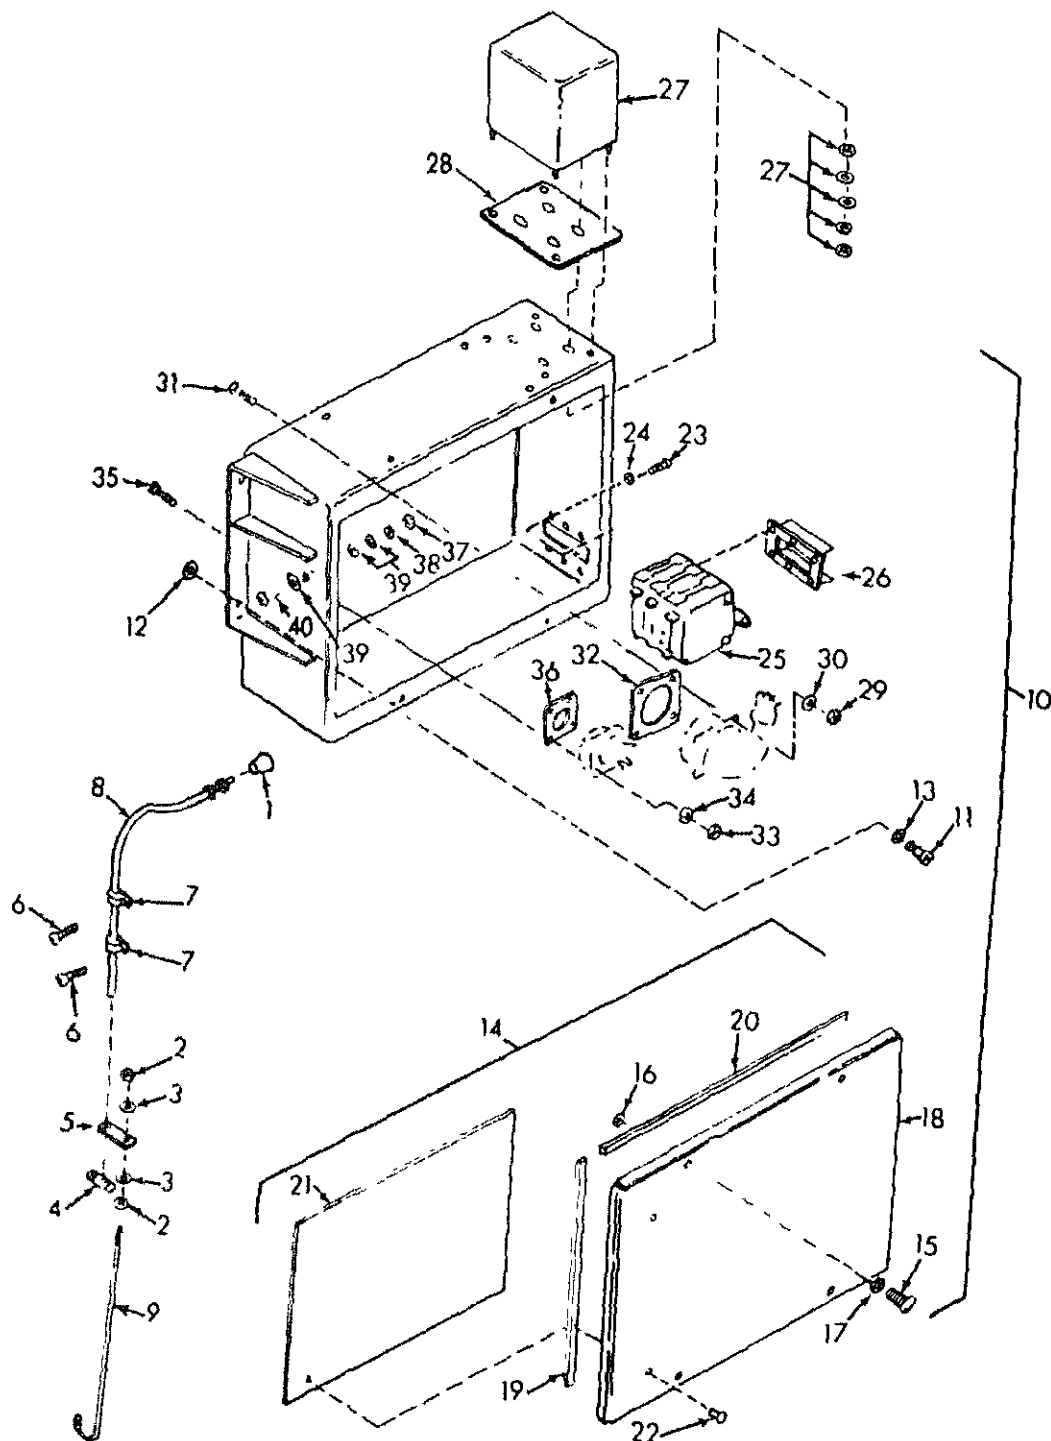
Junction Box Assembly (Sheet 1 of 3)
